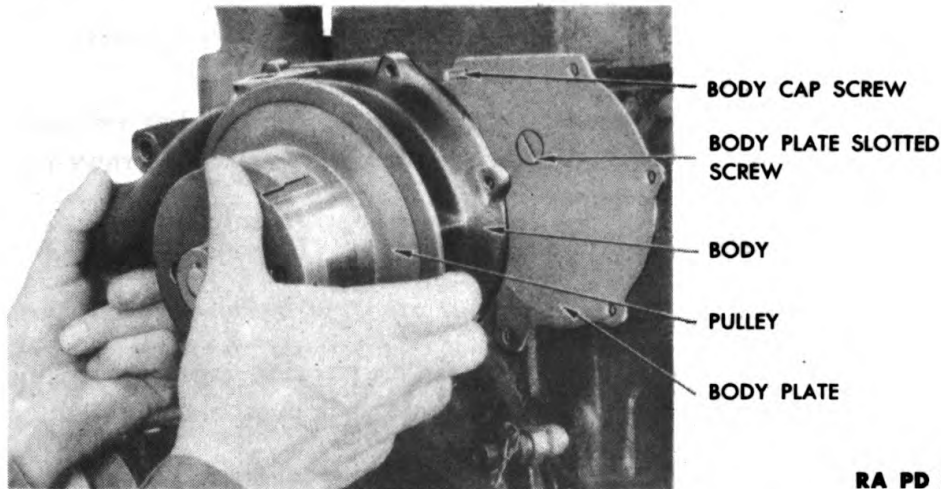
Removing Water Pump Drive Belt Adjusting Flange — Multiple Type Pump
